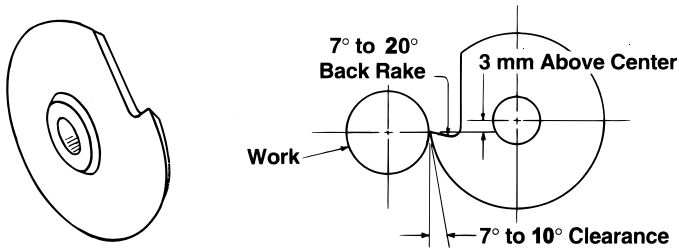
Suggested geometries for circular cut-off tools used on stainless steels.
